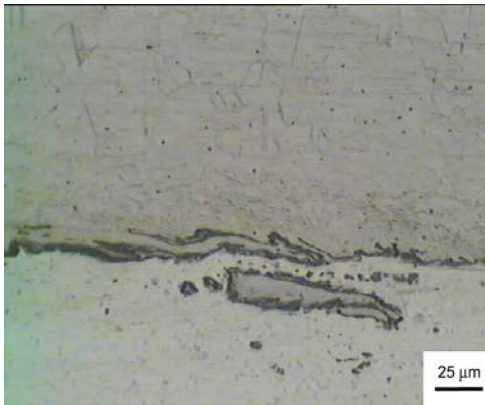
Failure at the interface of a SS/Al weld due to the contact of the pin with the foil.
